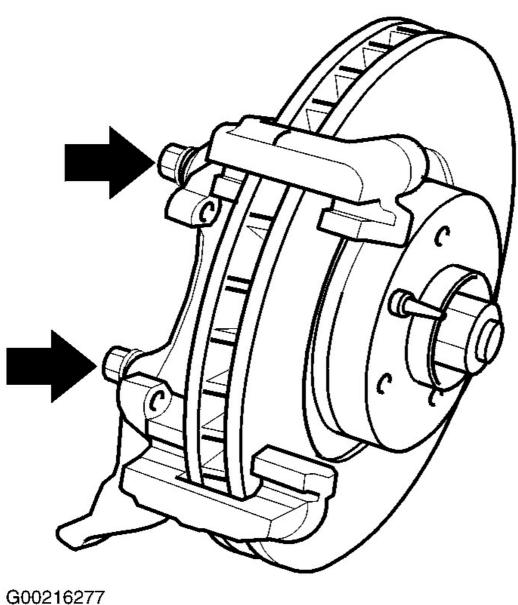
Identifying Front Caliper Mounting Bolts Courtesy of VOLVO CARS OF NORTH AMERICA.
